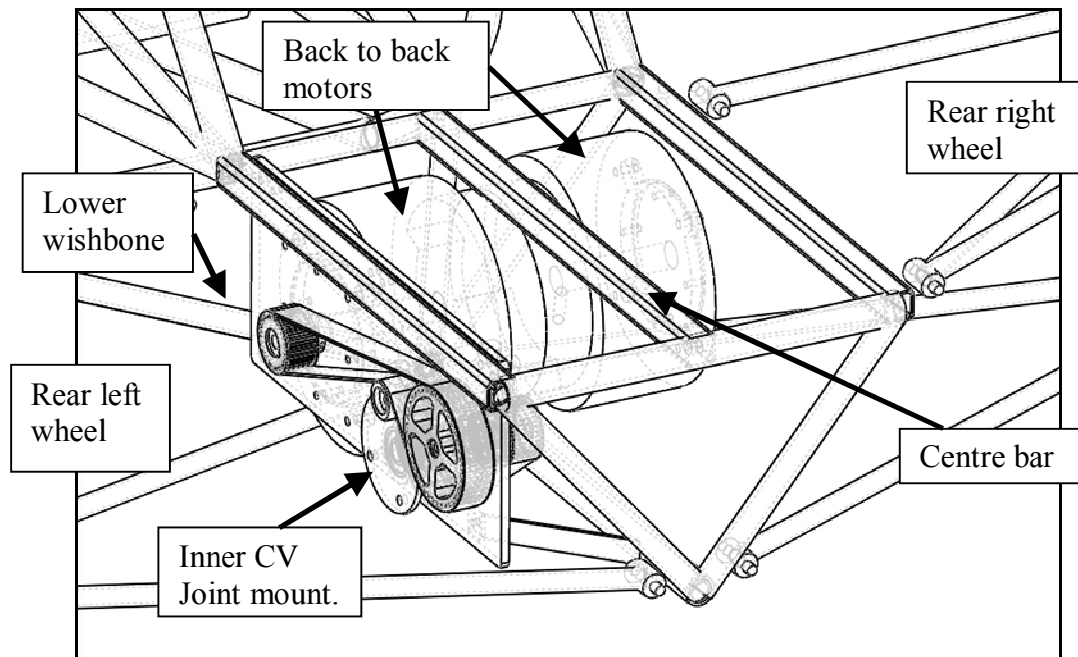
two motors run back to back – right motor assembly not shown.
